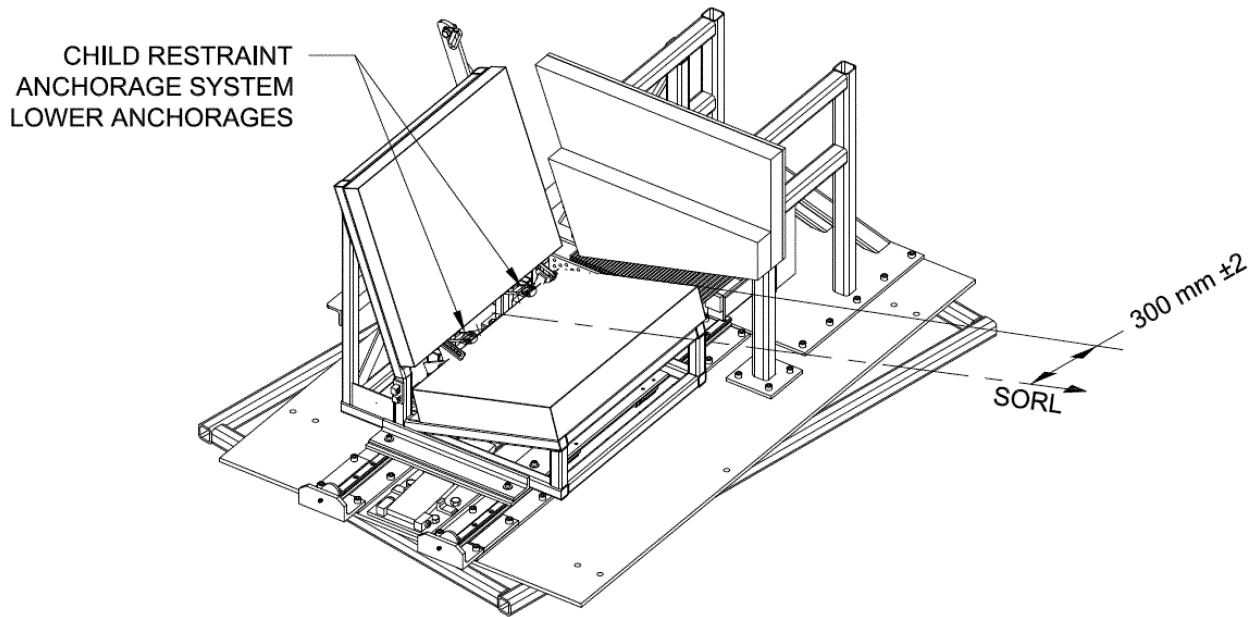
A to § 571.213a. Side Impact Seat Assembly Plan View
